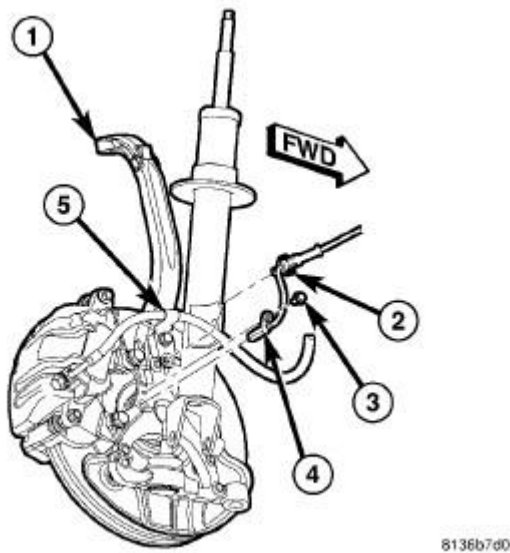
WHEEL SPEED SENSOR AT FRONT KNUCKLE
